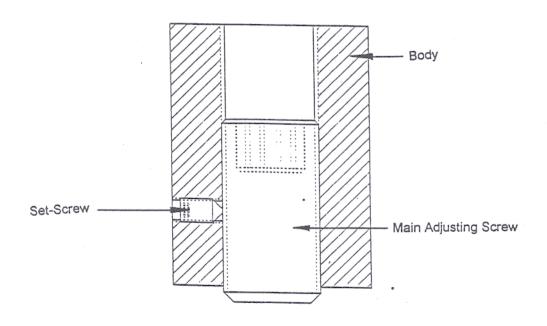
SPECIAL-HEADED LOCKING-SET SCREW
